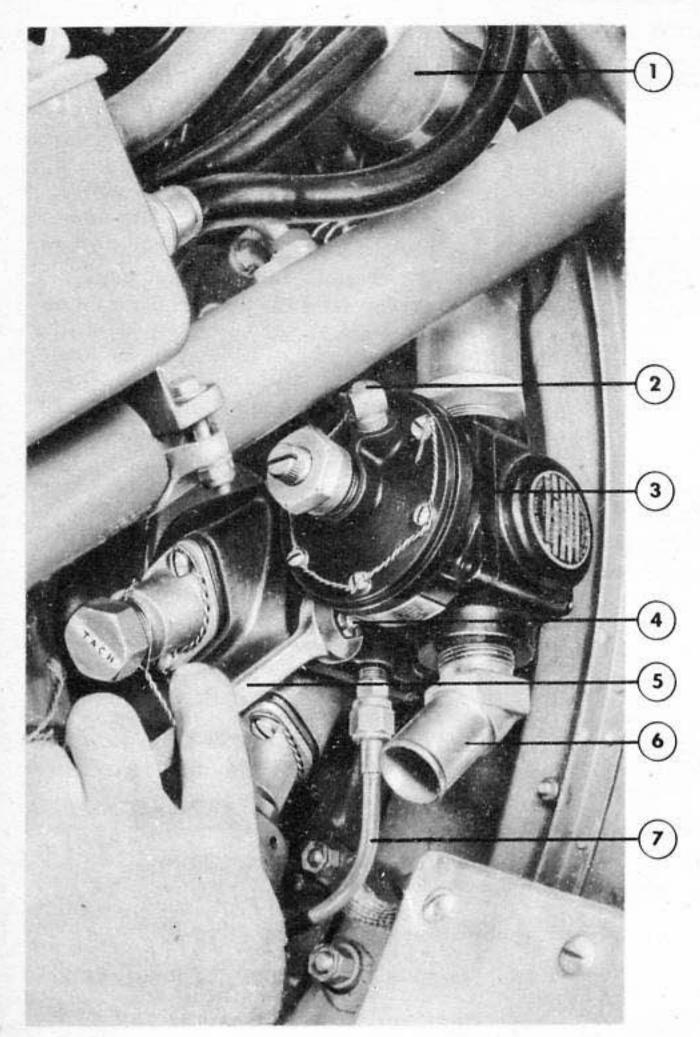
REMOVING OUTBOARD FUEL CONTAINER
